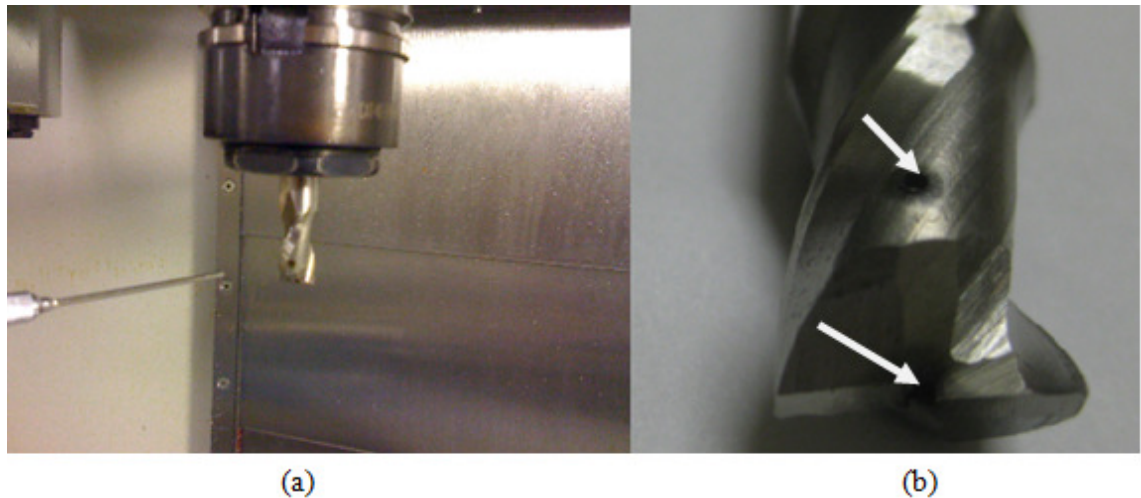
(a) Mist spray on a 12.7mm 2 flute end-mill. Nozzle is horizontally positioned at a radial distance of 25.4mm from the tool surface pointing towards the center of the tool. (b) Arrows pointing at the holes drilled on the tool.
